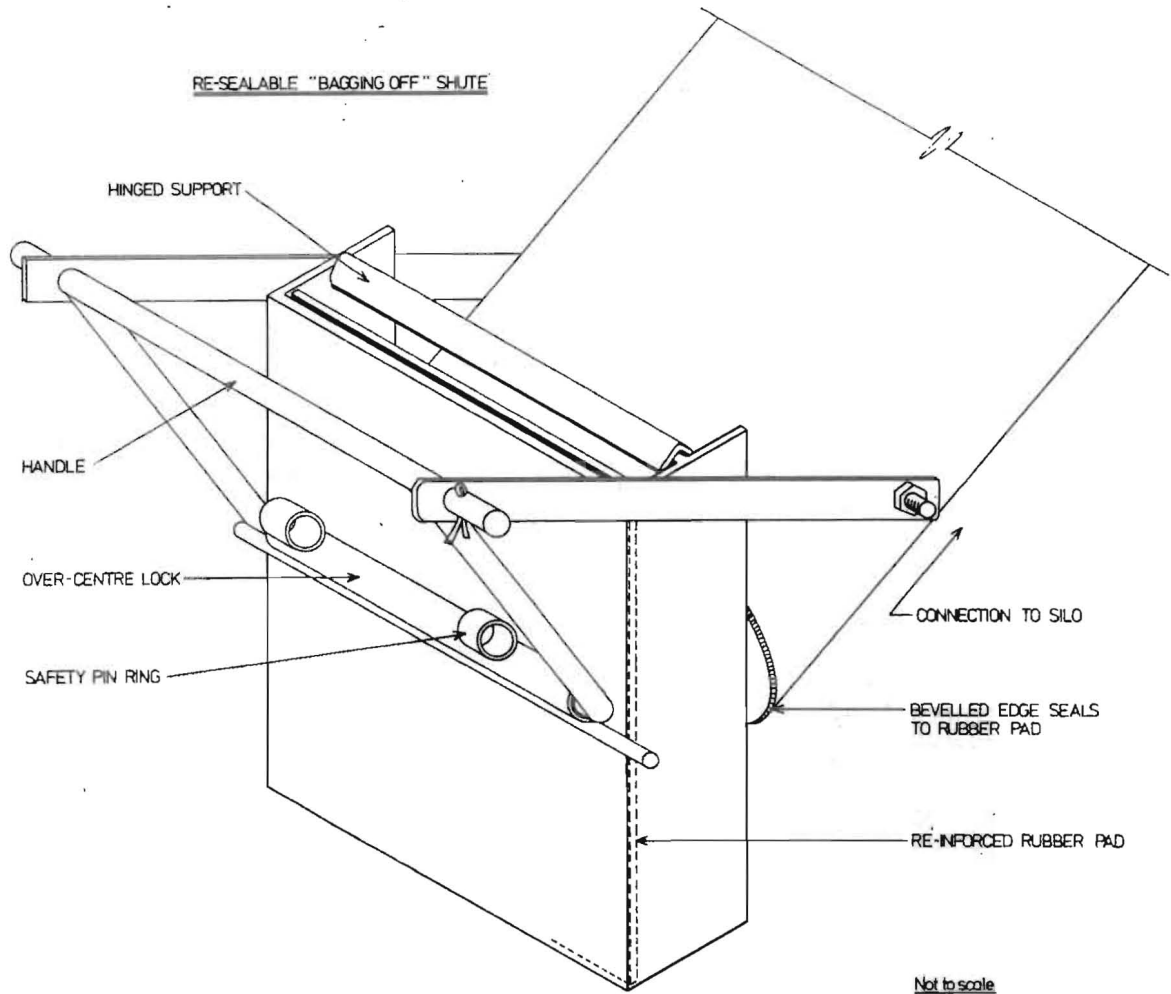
Design for a sealable bagging-off chute for a farm bin.
